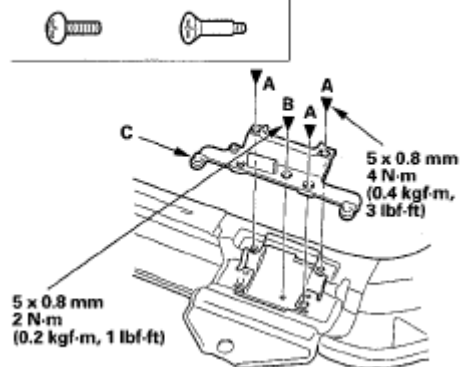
Identifying Upper Receiver Screws With Torque Specifications
